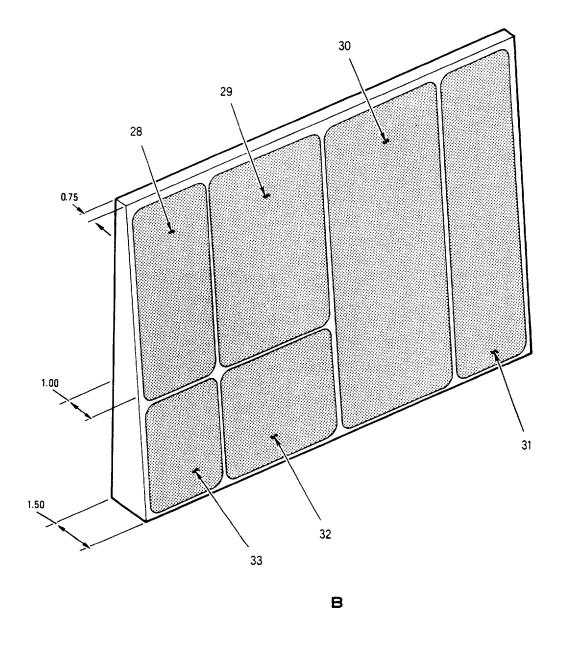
No. 2 Fuel Tank Cavity Foam Filler - 161353 THRU 161741 (Sheet 1)
